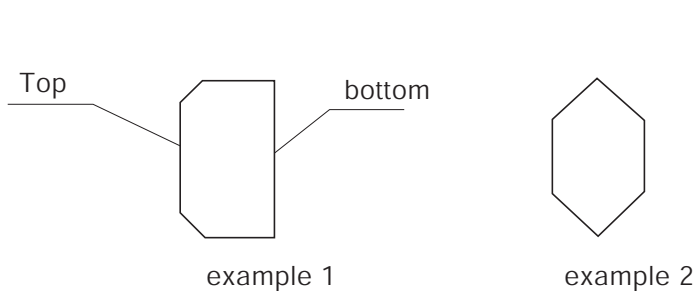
Cross sectional. drawing of E-nozzle gasket
